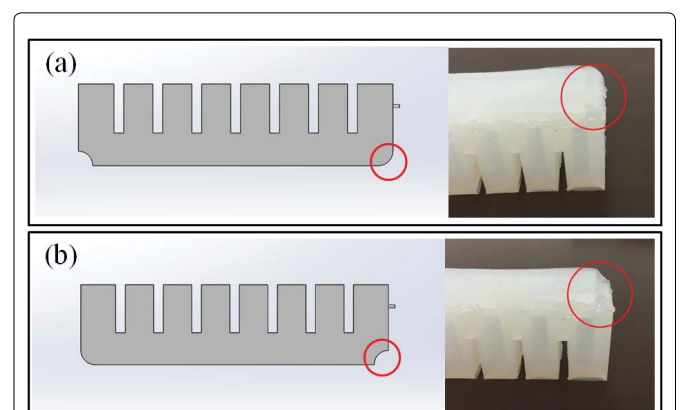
a) A deformable leg when pressurized. The convex surface prevents friction hysteresis, similar with the chamfered back leg in Figure 4; b) The same deformable leg when depressurized. The concave surface has a sharp edge on the bottom, which enables the passive friction hysteresis, similar with the front leg in Figure 4.
